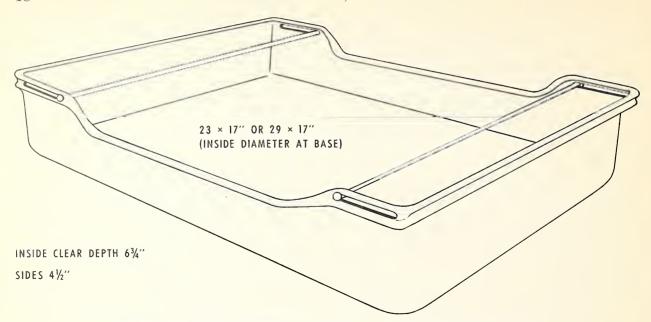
Reusable warehouse-to-store container for tray-packaged produce.
